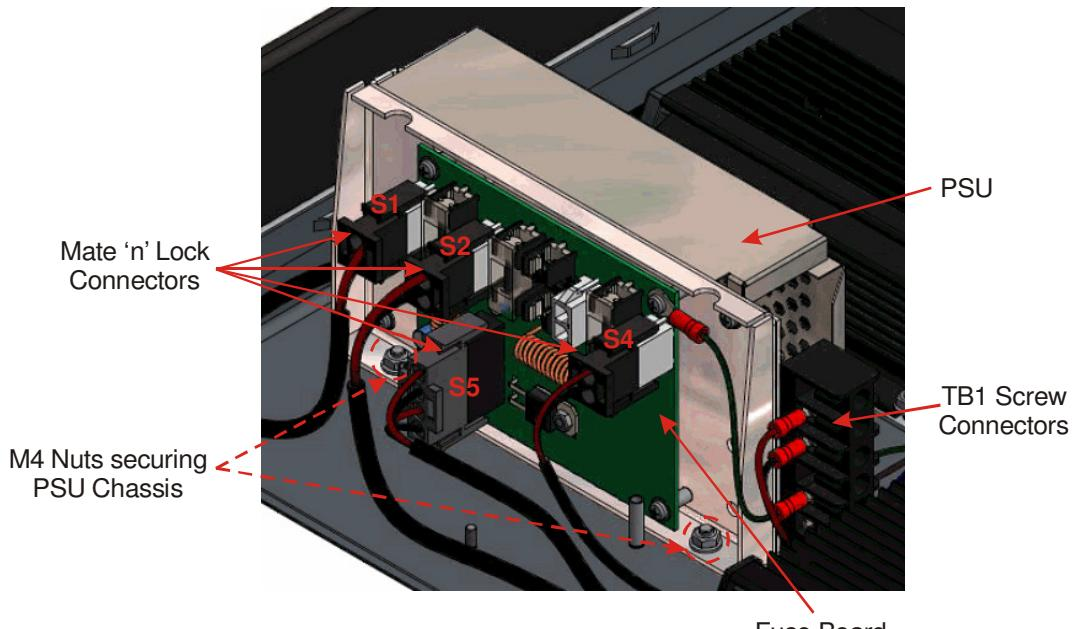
Removal of PSU and Fuse Board Assembly (AC version only).
